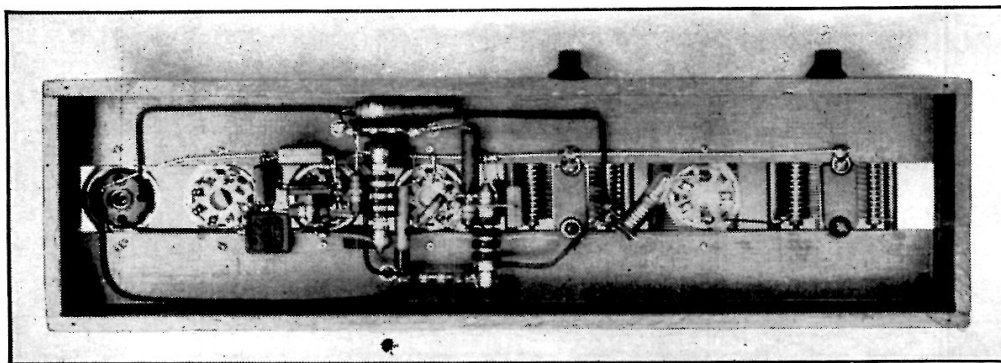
Bottom view of the 2-tube low-power transmitter. The by-pass condensers, r.f. chokes and resistors are grouped around the tube sockets. The ground wire mentioned in the text runs along the top edge of the lower chassis strip. The indicator lamp, I_1 , is wired in the B+ line just below the amplifier plate r.f. choke. It is placed underneath the chassis where it can be viewed from above through the opening between the chassis strips. The r.f. choke to the right is in the amplifier and the one to the left is in the oscillator circuit.
